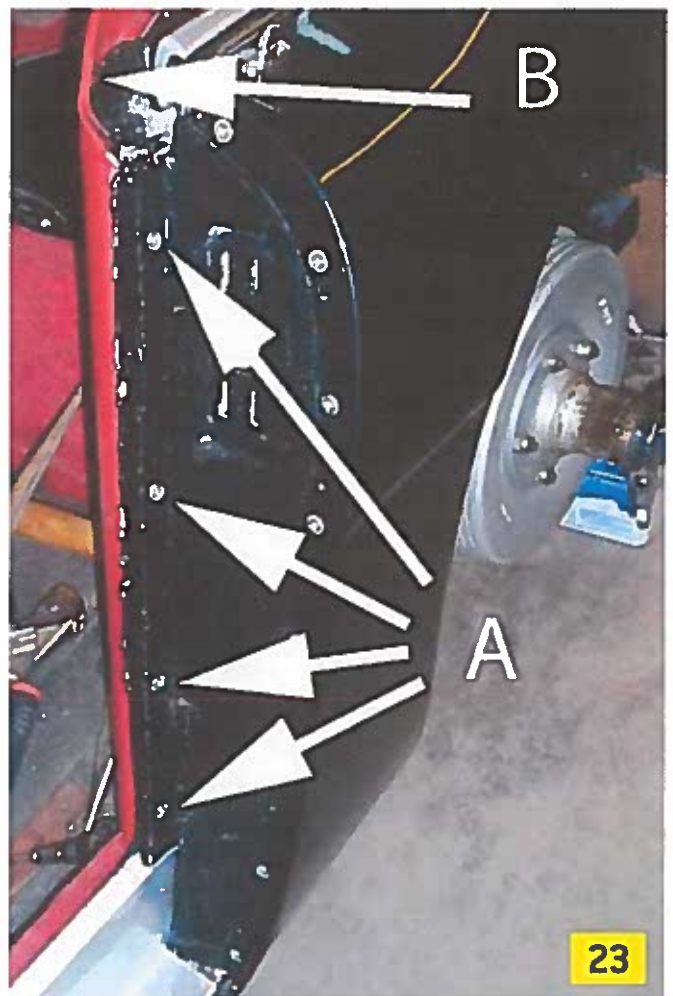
Four flat head wood screws (A) attach the front edge of the rear quarter panel on 6-cylinder roadsters to the door shut pillar flange. A 3000 BT7 is shown here. The metal cup (B) may need to be bent a bit to allow clearance for the seal to fit between it and the top edge of the trim panel.
